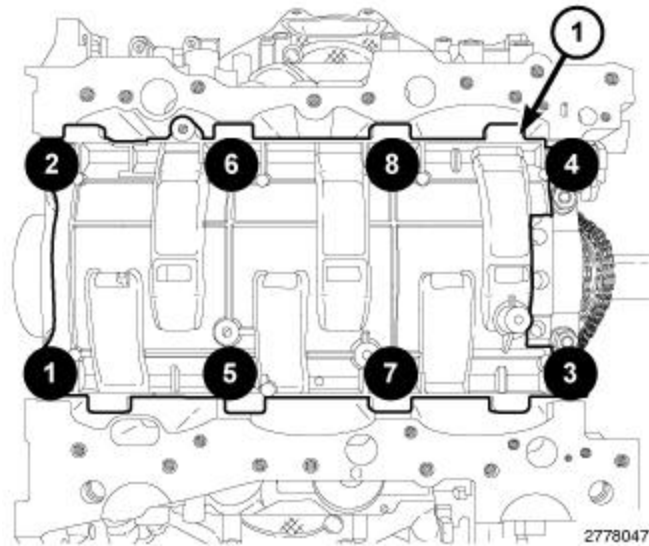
Main Bearing Cap Bolts From Windage Tray Removal Sequence
